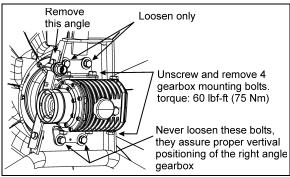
RIGHT ANGLE GEARBOX MOUNTING 05126
